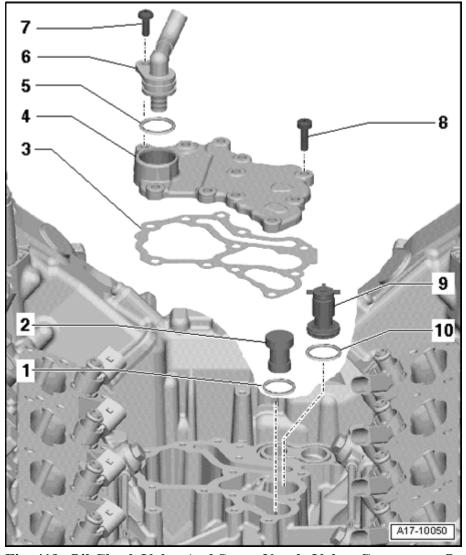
Oil Check Valve And Spray Nozzle Valve, Component Overview
